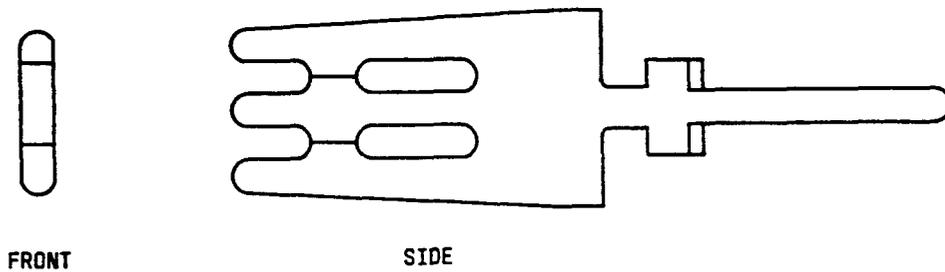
Views of Quick-Clip Terminal Used on 112-Type Connecting Block
